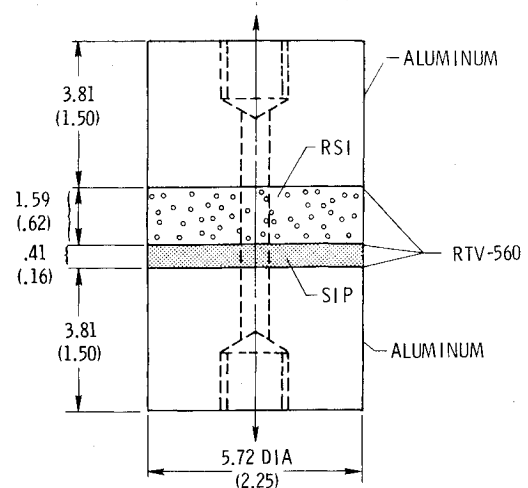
Cyclic fatigue test specimen. Dimensions given in cm (in.).
